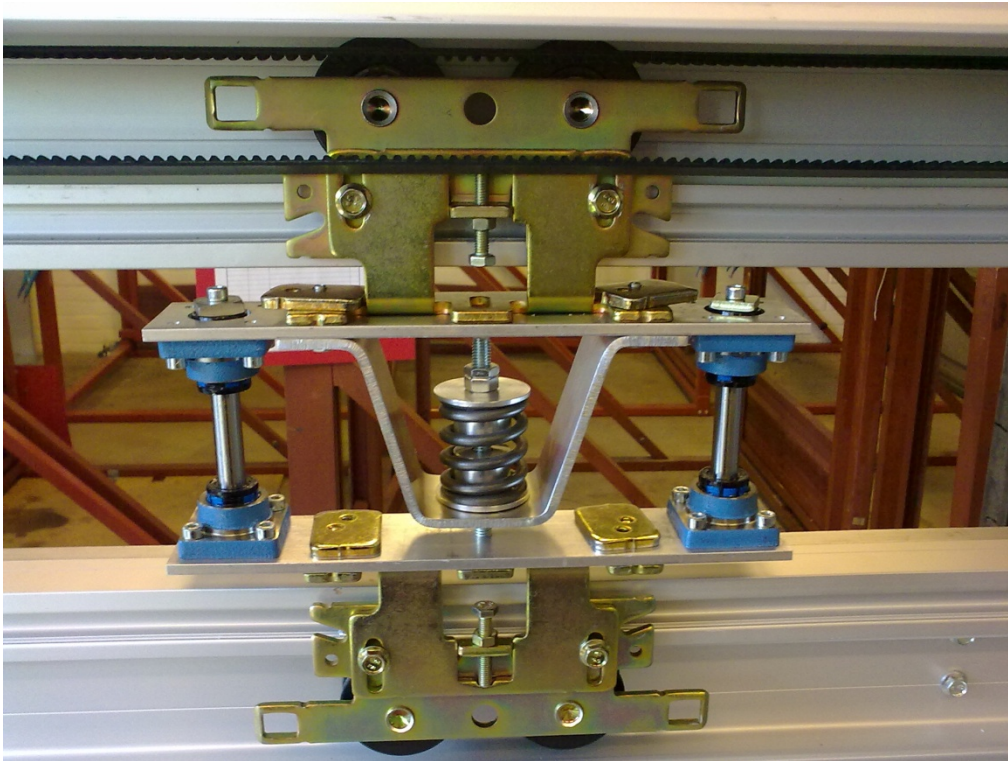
Assembly of the contractor is completed, and it is mounted on the track.
